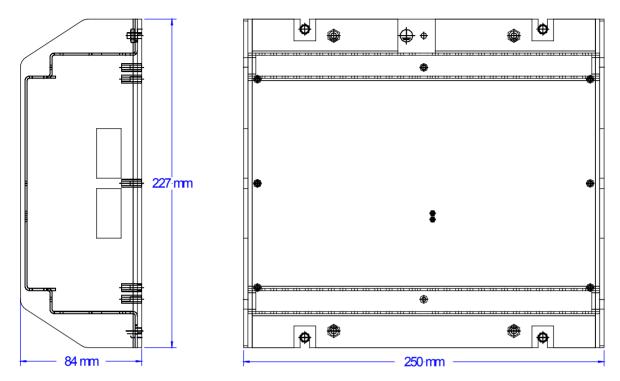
Sheet metal housing easYgen-3000 - dimensions
